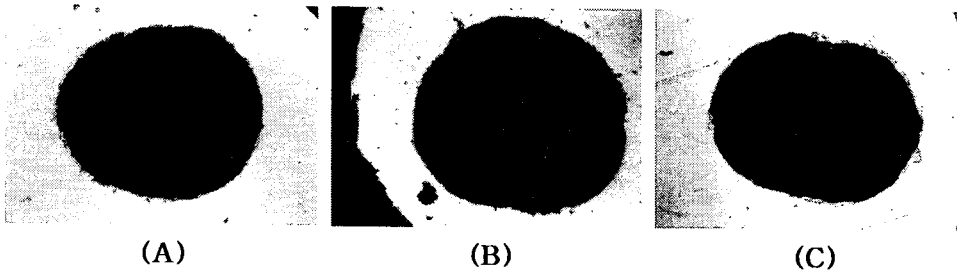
Wearing shape of forging tips after 5 hours continuous welding(x40) A) FCU tip, B) FCR tip, C) FCT tip
